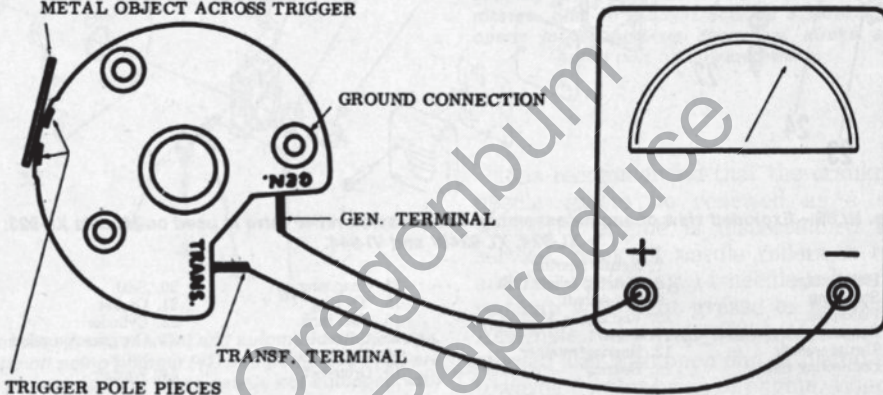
Drawing showing volt-ohmmeter connections to ignition module (3—Fig. HL84) for checking module. It should be noted that this is not a conclusive test and module should be renewed in event of spark failure when other magneto components test OK.
